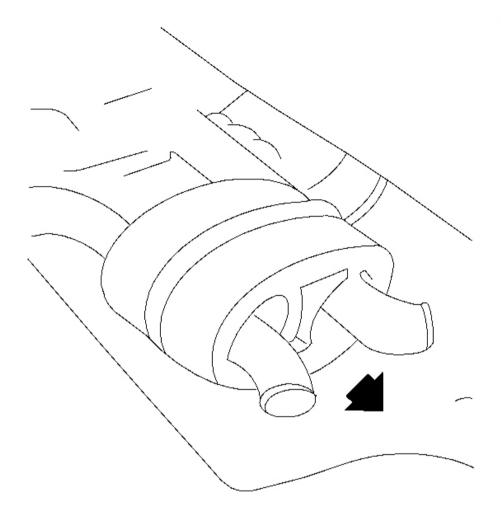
View Of Rubber Exhaust Hangers Courtesy of GENERAL MOTORS CORP.
